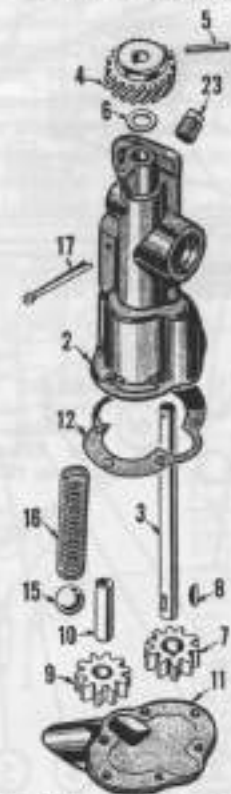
Early model 30, 30K, 44, 44D, 44K, 44LP and 44(6) transmission oil pump exploded view.
